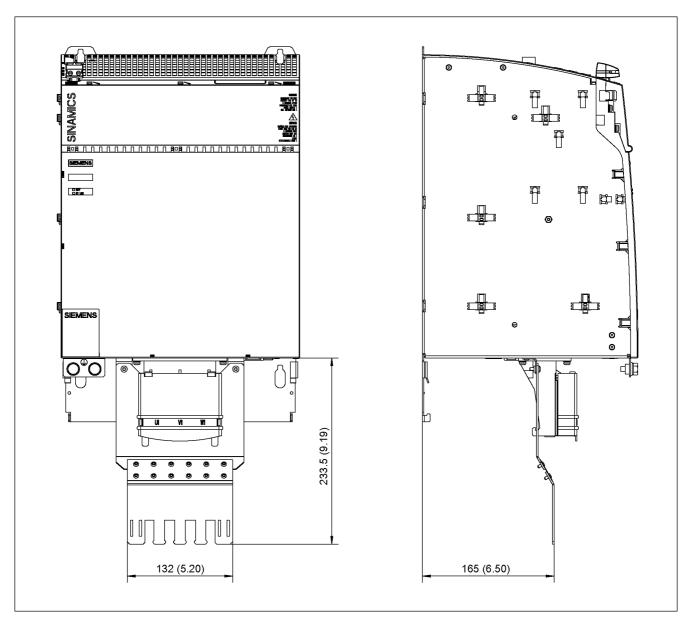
Dimension drawing of shield terminal plate on a 300 mm component (Line Module or Motor Module) with internal air cooling
